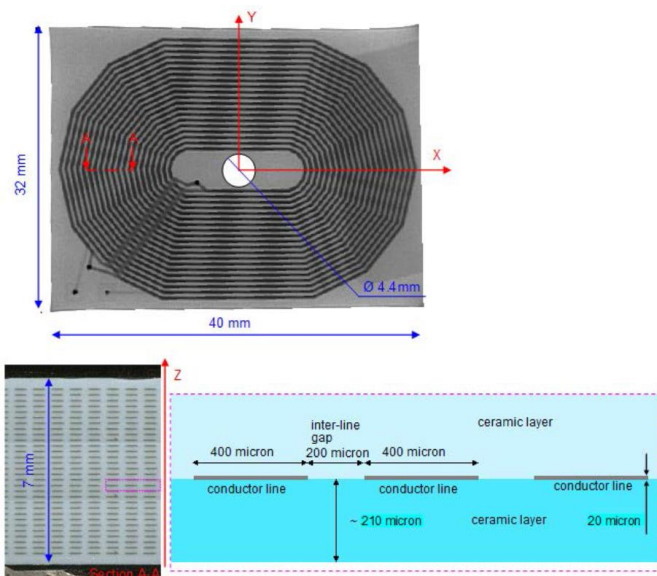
details on the geometry and the winding pattern of the LTCC sensor prototypes
